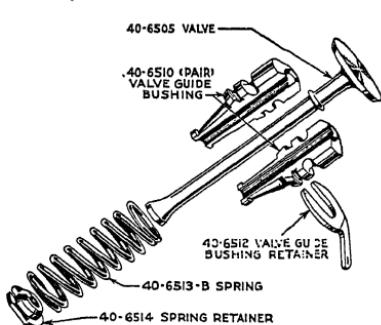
Ford Valve, Valve Guide, Retainer, and Spring
